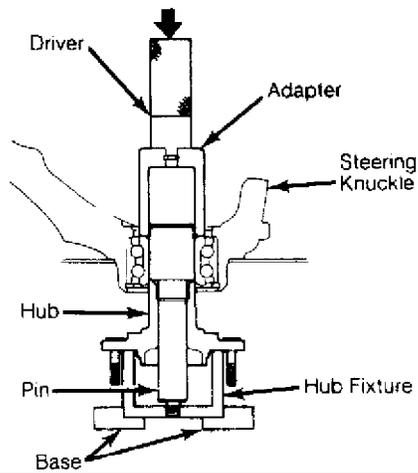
Pressing Knuckle/Bearing Assembly Onto Hub
